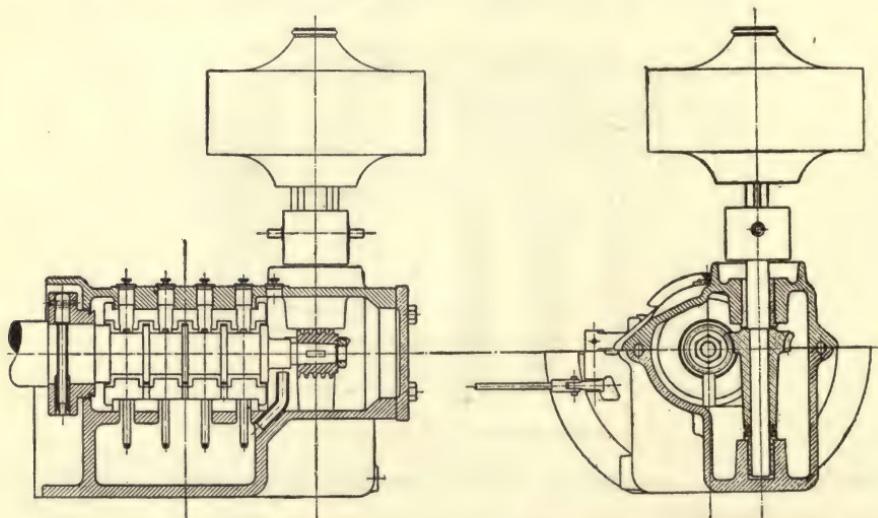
Radial and thrust bearing of DeLaval Class C turbine.
